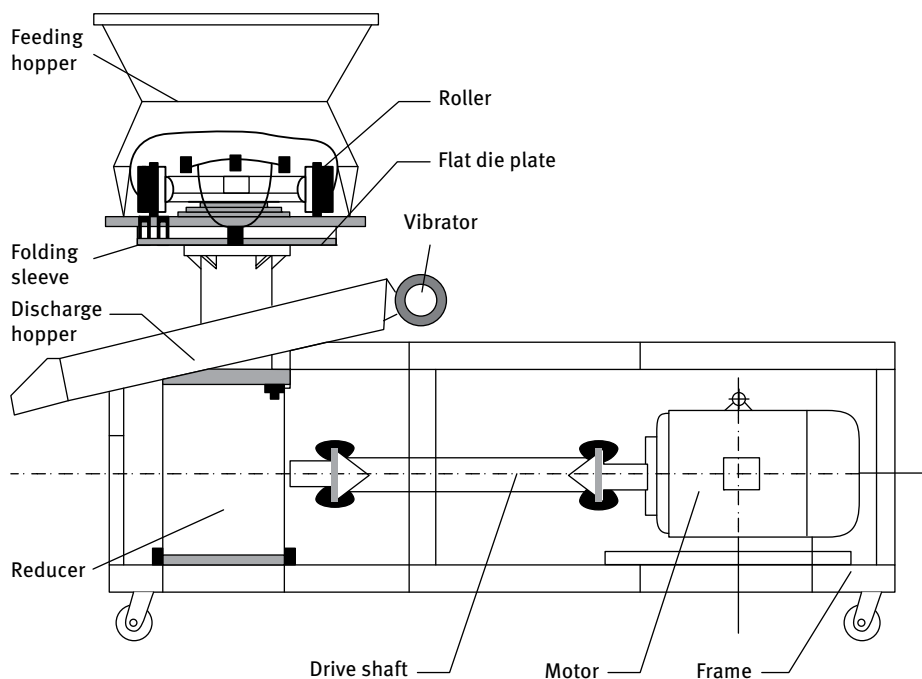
Schematic representation of flat die-type block-shaped fuel briquetting machine.
